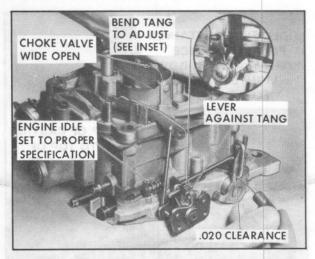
Secondary Throttle Closing Adjustment (On Car)
